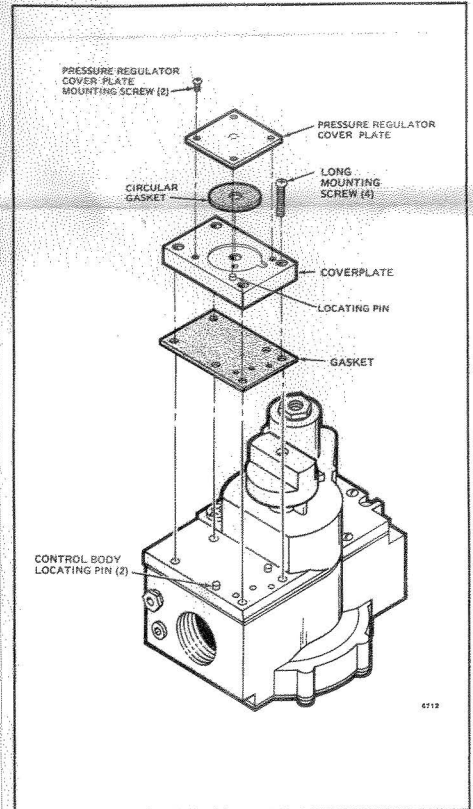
Use long mounting screws when mounting operator-regulator cover plate on V800 high capacity control.
